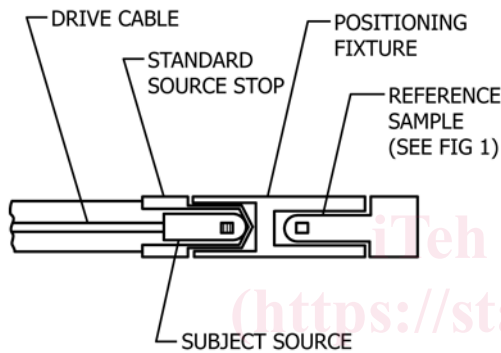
Typical Arrangement Using a Standard Guide Tube and Special Positioning Fixture
